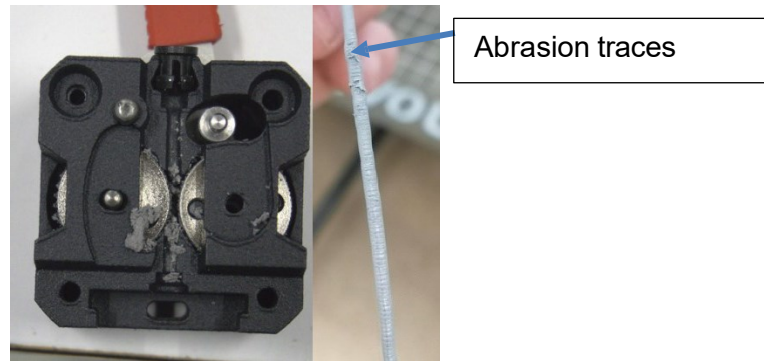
Material build-up in the extruder between the gear (left) and gear marks on the filament (right)
